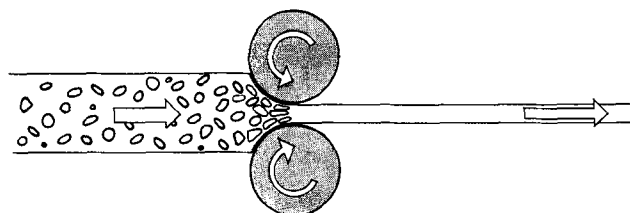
Schematic diagram of a possible strip casting process using SSM technology.
